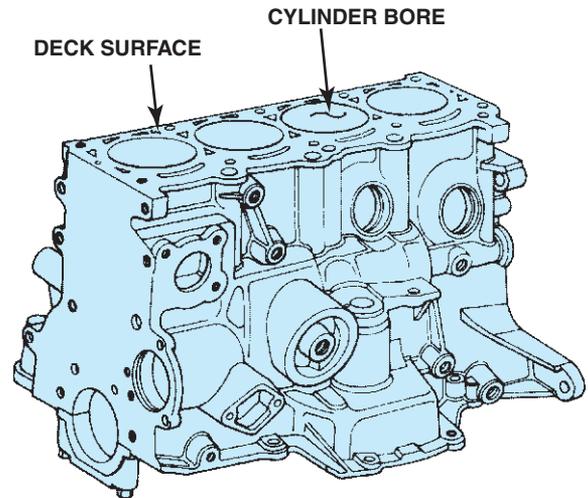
The deck is the machined top surface of the block. Note all of the passages and holes that are part of the typical block.
